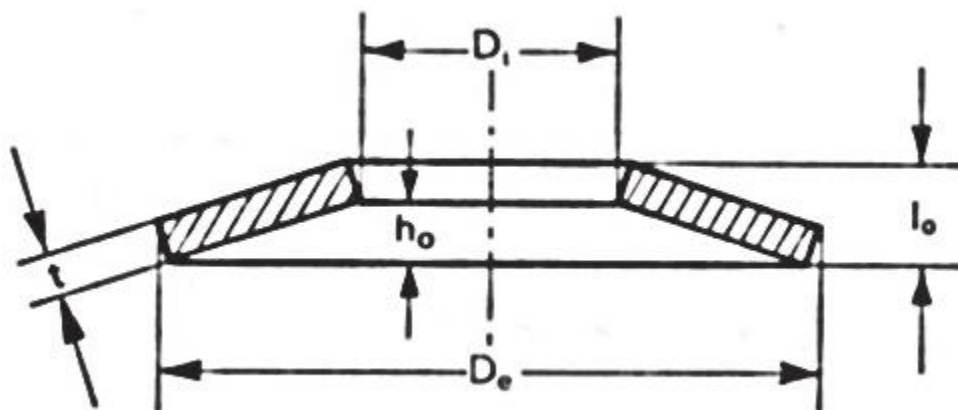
Given disc spring dimensions from Key Belleville. [28]
